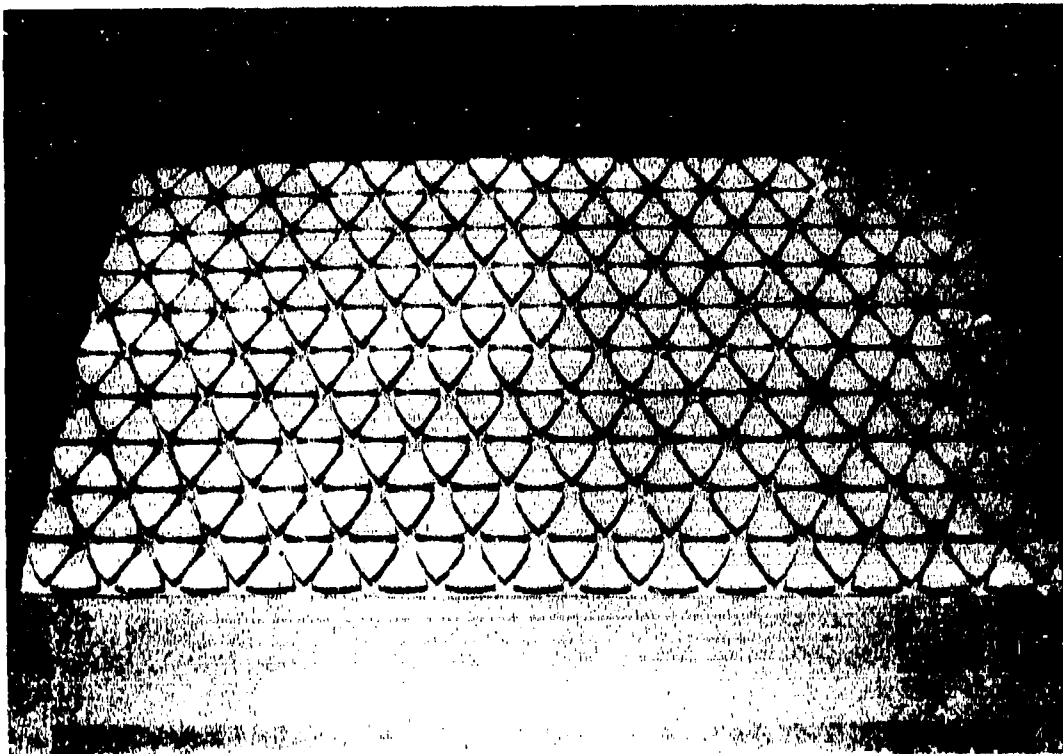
TOP VIEW OF FEMALE ISOGRID MOLD
